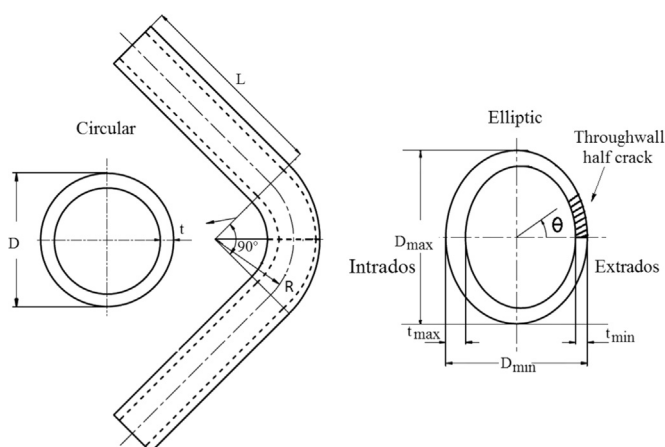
90° Pipe bend with attached straight pipe showing assumed elliptic cross section with circumferential throughwall crack.
